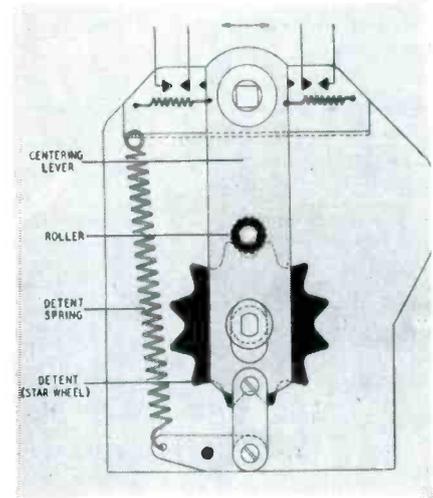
and 4. In Fig. 3 appears a rear view of the detent and roller assembly. An exploded view of the cycling switch and detent assembly for the channel selector is shown in Fig. 4.
